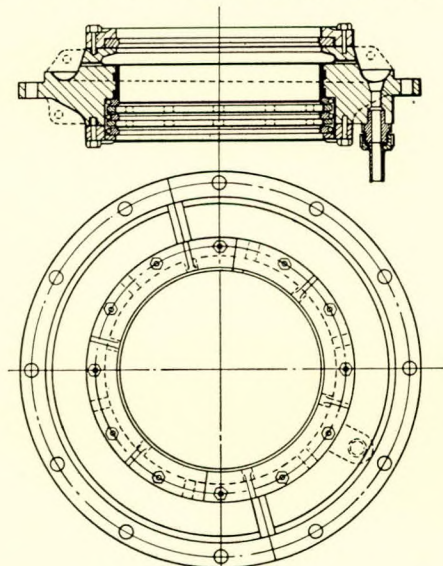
Details of gland as now fitted to the single-cylinder engine. The bore is to suit a 370 mm. diameter rod
